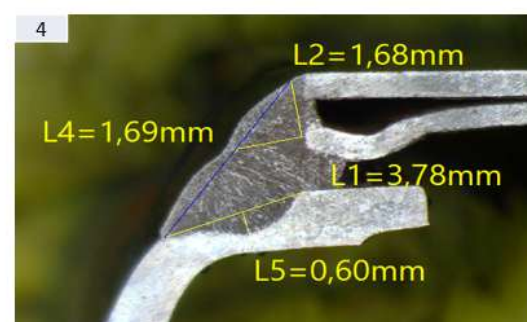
Flare-Bevel-Groove Weld, Convex
